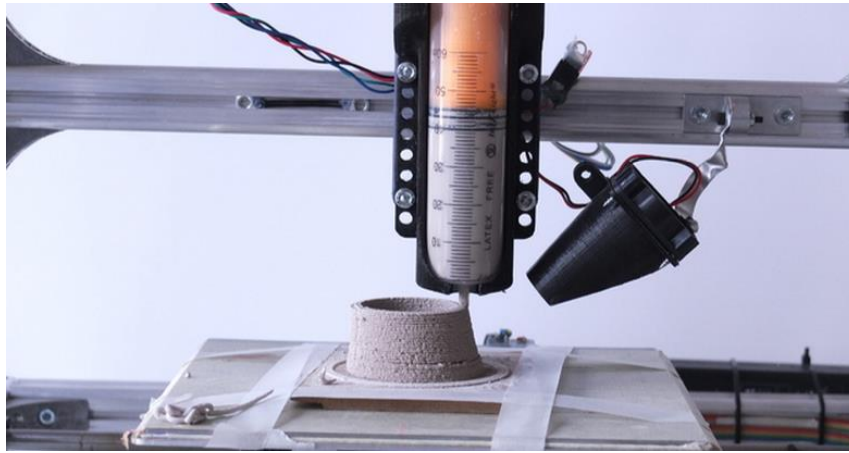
Example of Syringe Extrusion 3D printing technology [36].
